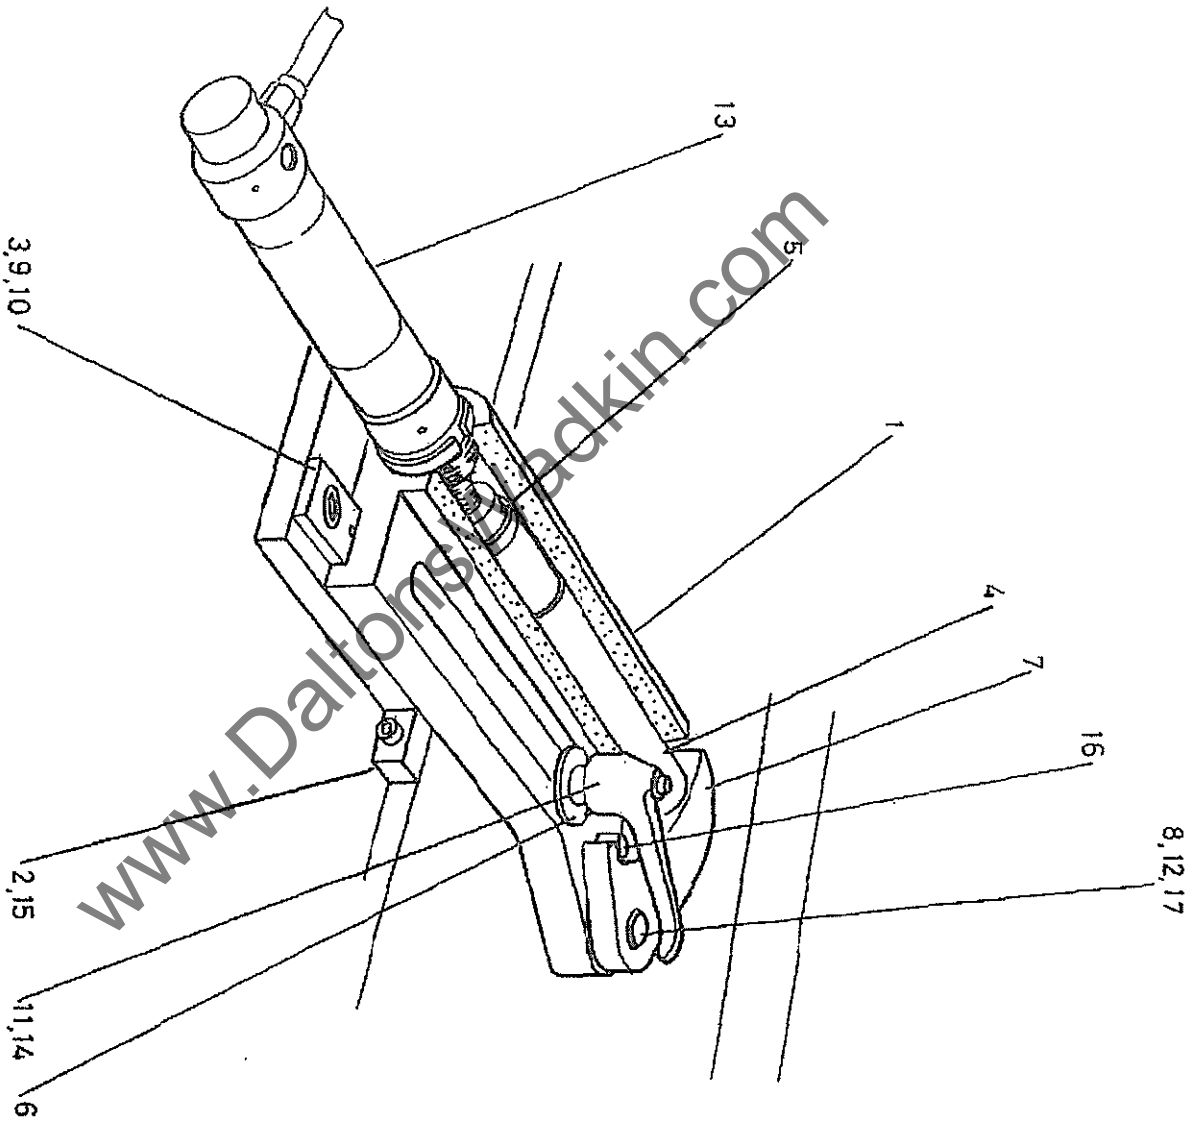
PNEUMATIC 'SKID' TYPE SIDE PRESSURE
